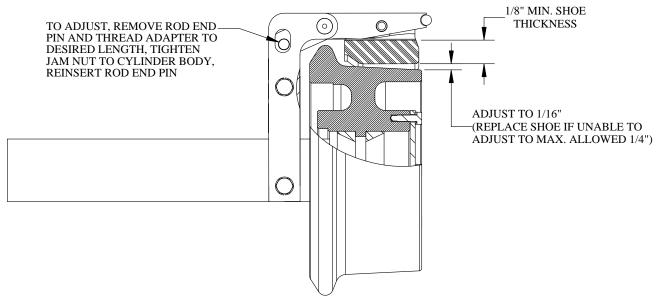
A - Rail Brake Adjustment - Hydraulic
